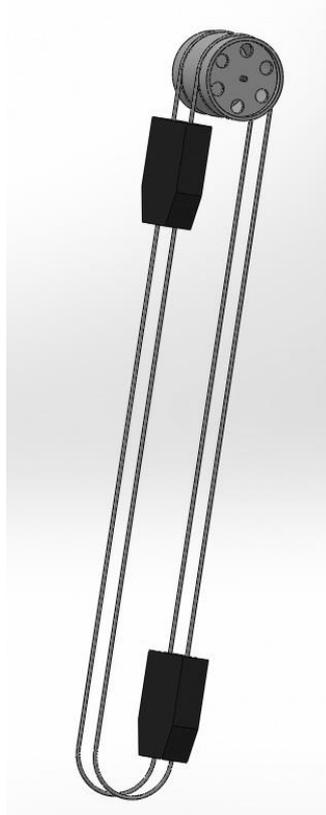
Assembly of statically balanced multi-rope hoisting machinery
